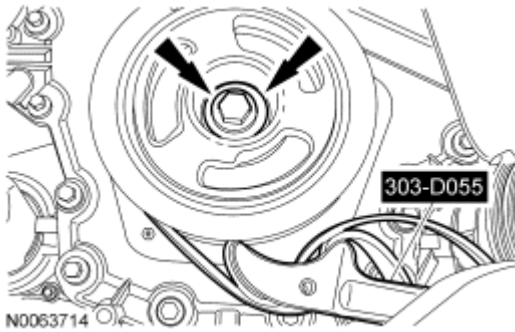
Installing Crankshaft Pulley Washer & Bolt Using Special Tools (303-D055)
